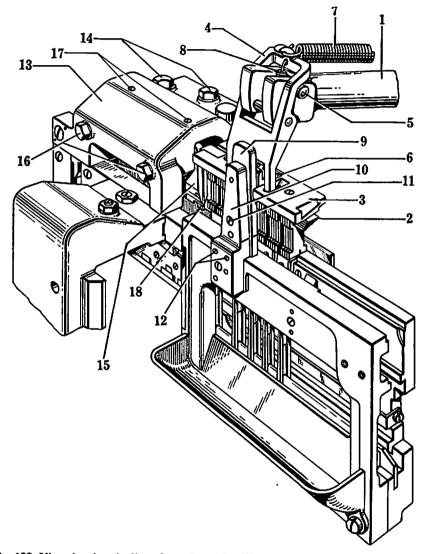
View showing the line of matrices being lifted out of the transfer channel by the second elevator on its way upward to the distributor. The spacebands are held in the transfer channel by the front sleeve lugs, which entered a groove in the front plate of the channel when the line was transferred. The spacebands are returned to the spaceband box when the elevator transfer lever and the spaceband lever move together for the second time and then move back to normal position.
